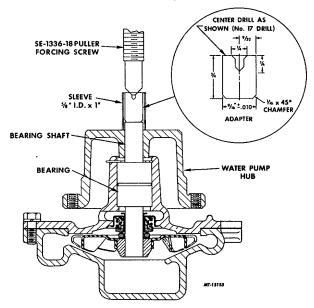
Using puller SE-1336-18, Adapter and Sleeve, Remove Pulley Hub
